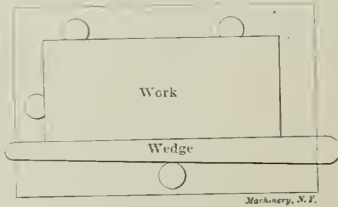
Wedge Acting as Clamp in Drill Jig.
